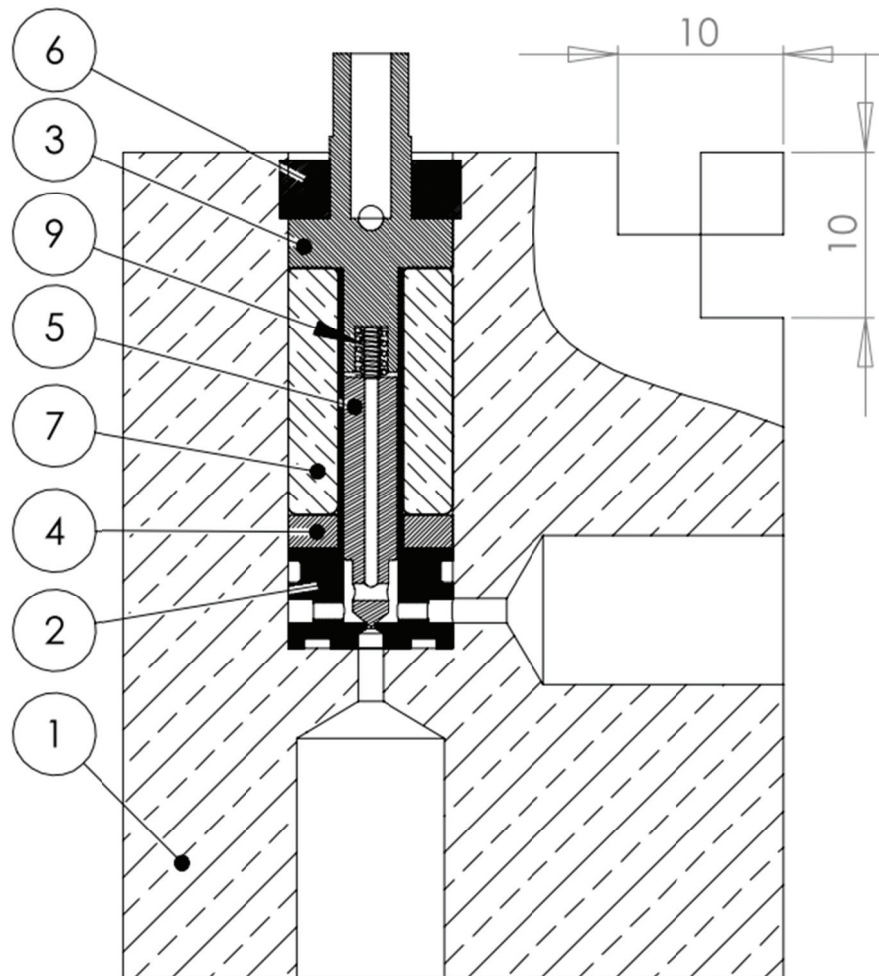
CAD-image with scale of assembled prototype. Parts are 1-Manifold, 2-Valve Body, 3-Upper Iron Core, 4-Iron ring, 5-The Needle, 6-Installation Screw Ring, 7-The Coil, 9-Return Springs(two pcs.)
